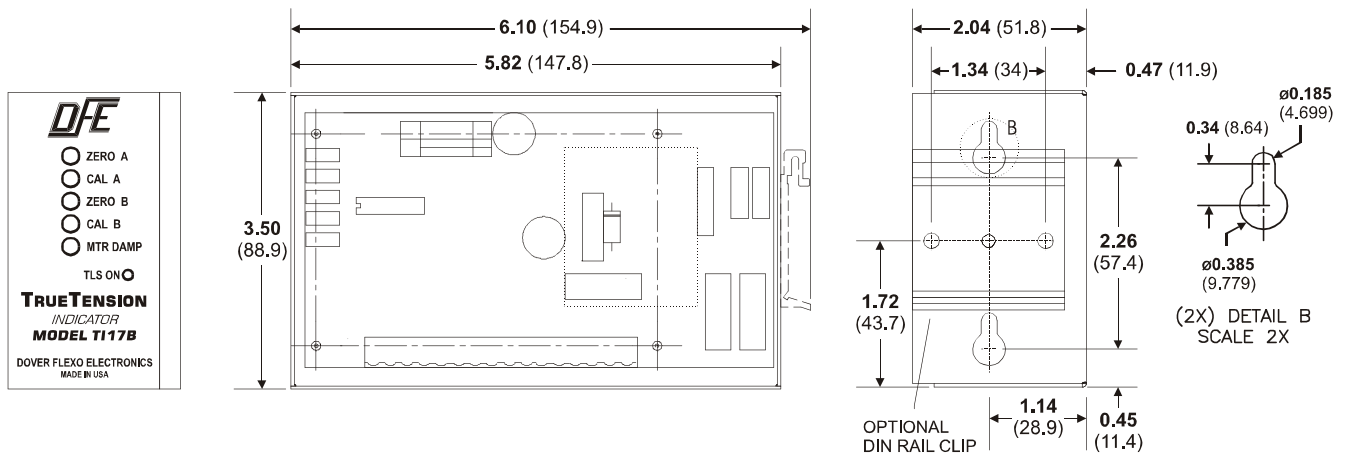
HORIZONTAL MOUNTING DIMENSIONS
